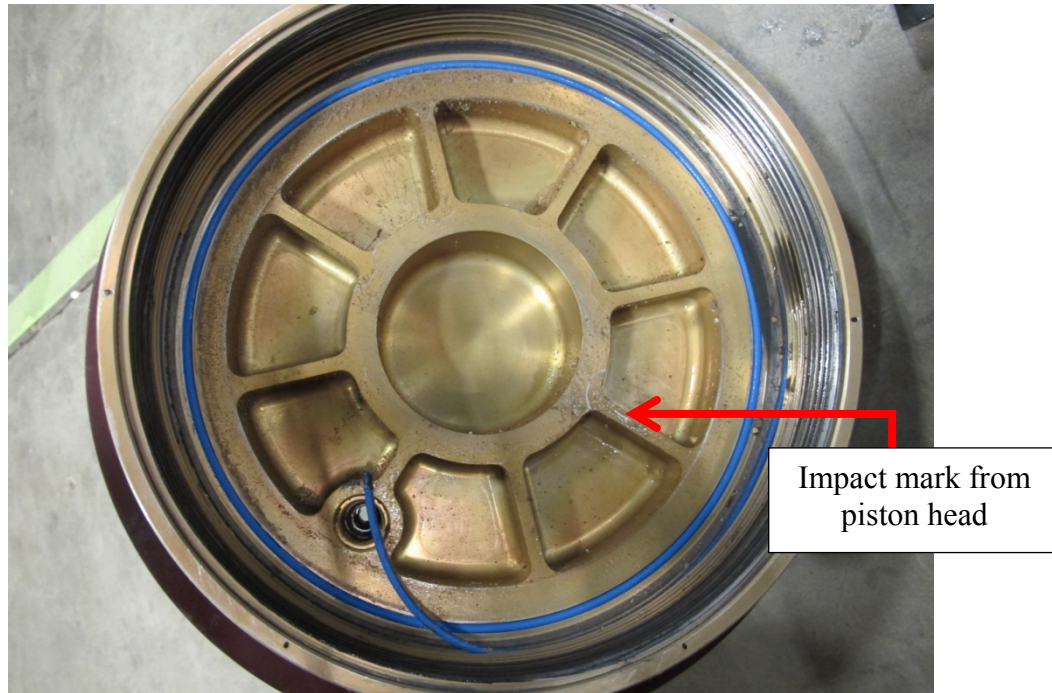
Interior of aft cylinder cap with seal and impact marks from piston head
